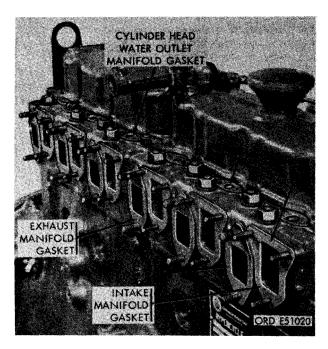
REMOVING OR INSTALLING INTAKE , EXHAUST, AND CYLINDER HEAD WATER OUTLET MANIFOLD GASKETS.
